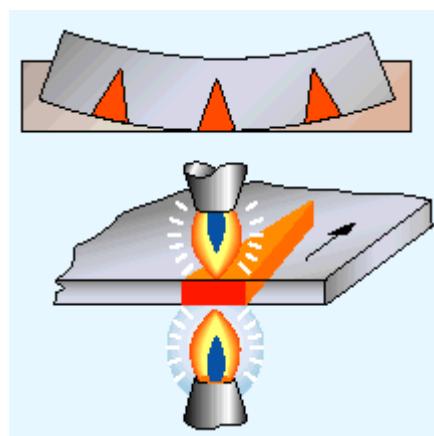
Line heating to correct angular distortion in a fillet weld.
